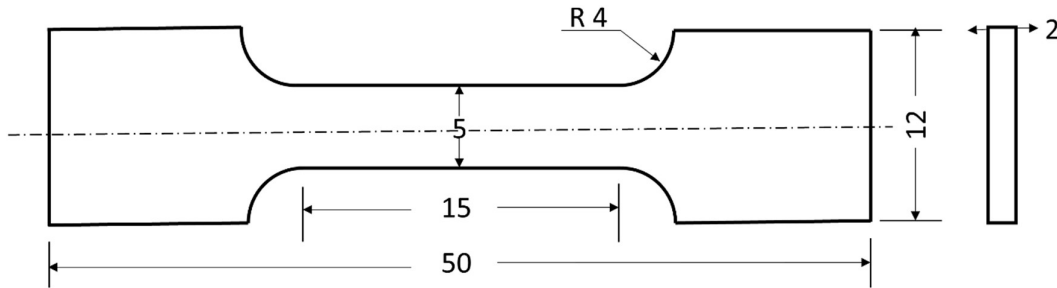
Tensile specimen with dimensions according to ASTM E8-04.
